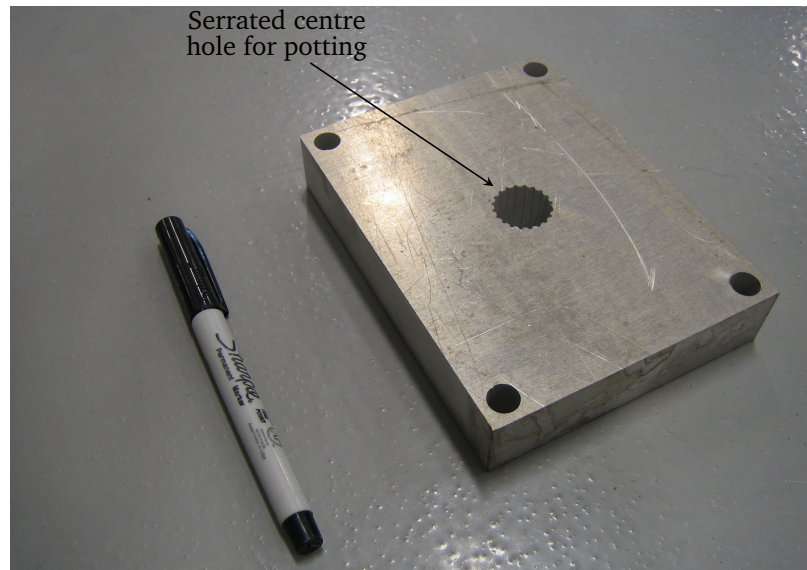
Aluminium end fixture plates used to restrain ends of tube specimens tested in pure torsion.
